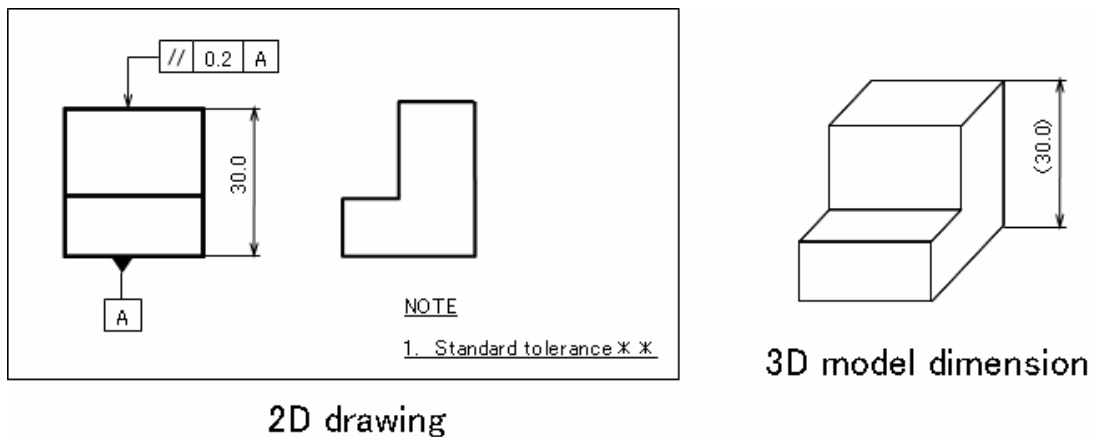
3D model created using the basic dimension value of standard tolerance (Example)
